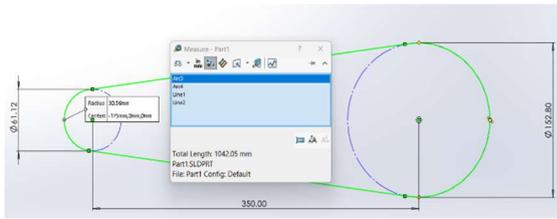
Belt 2 Length Calculation by 2D Sketch
